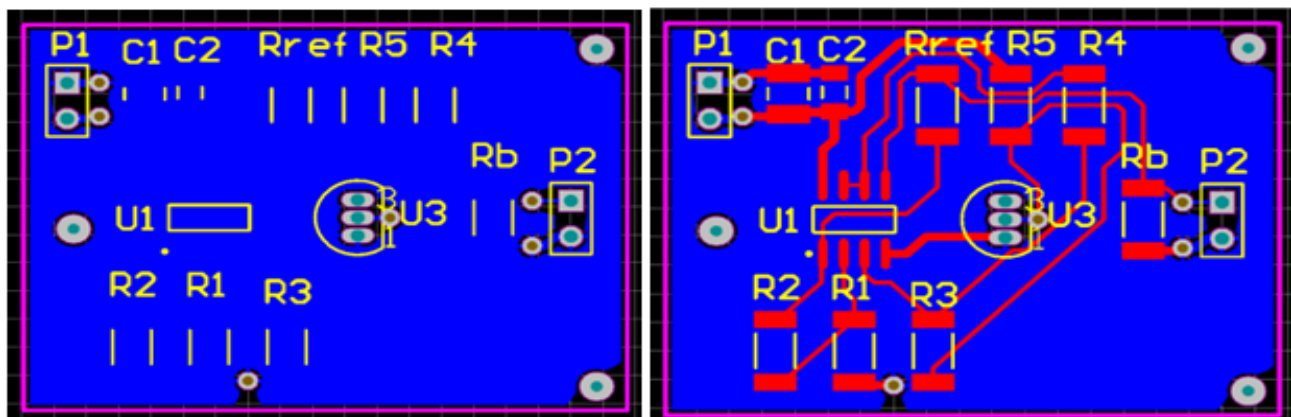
Printed matter WIT added mass GND on the bottom side
